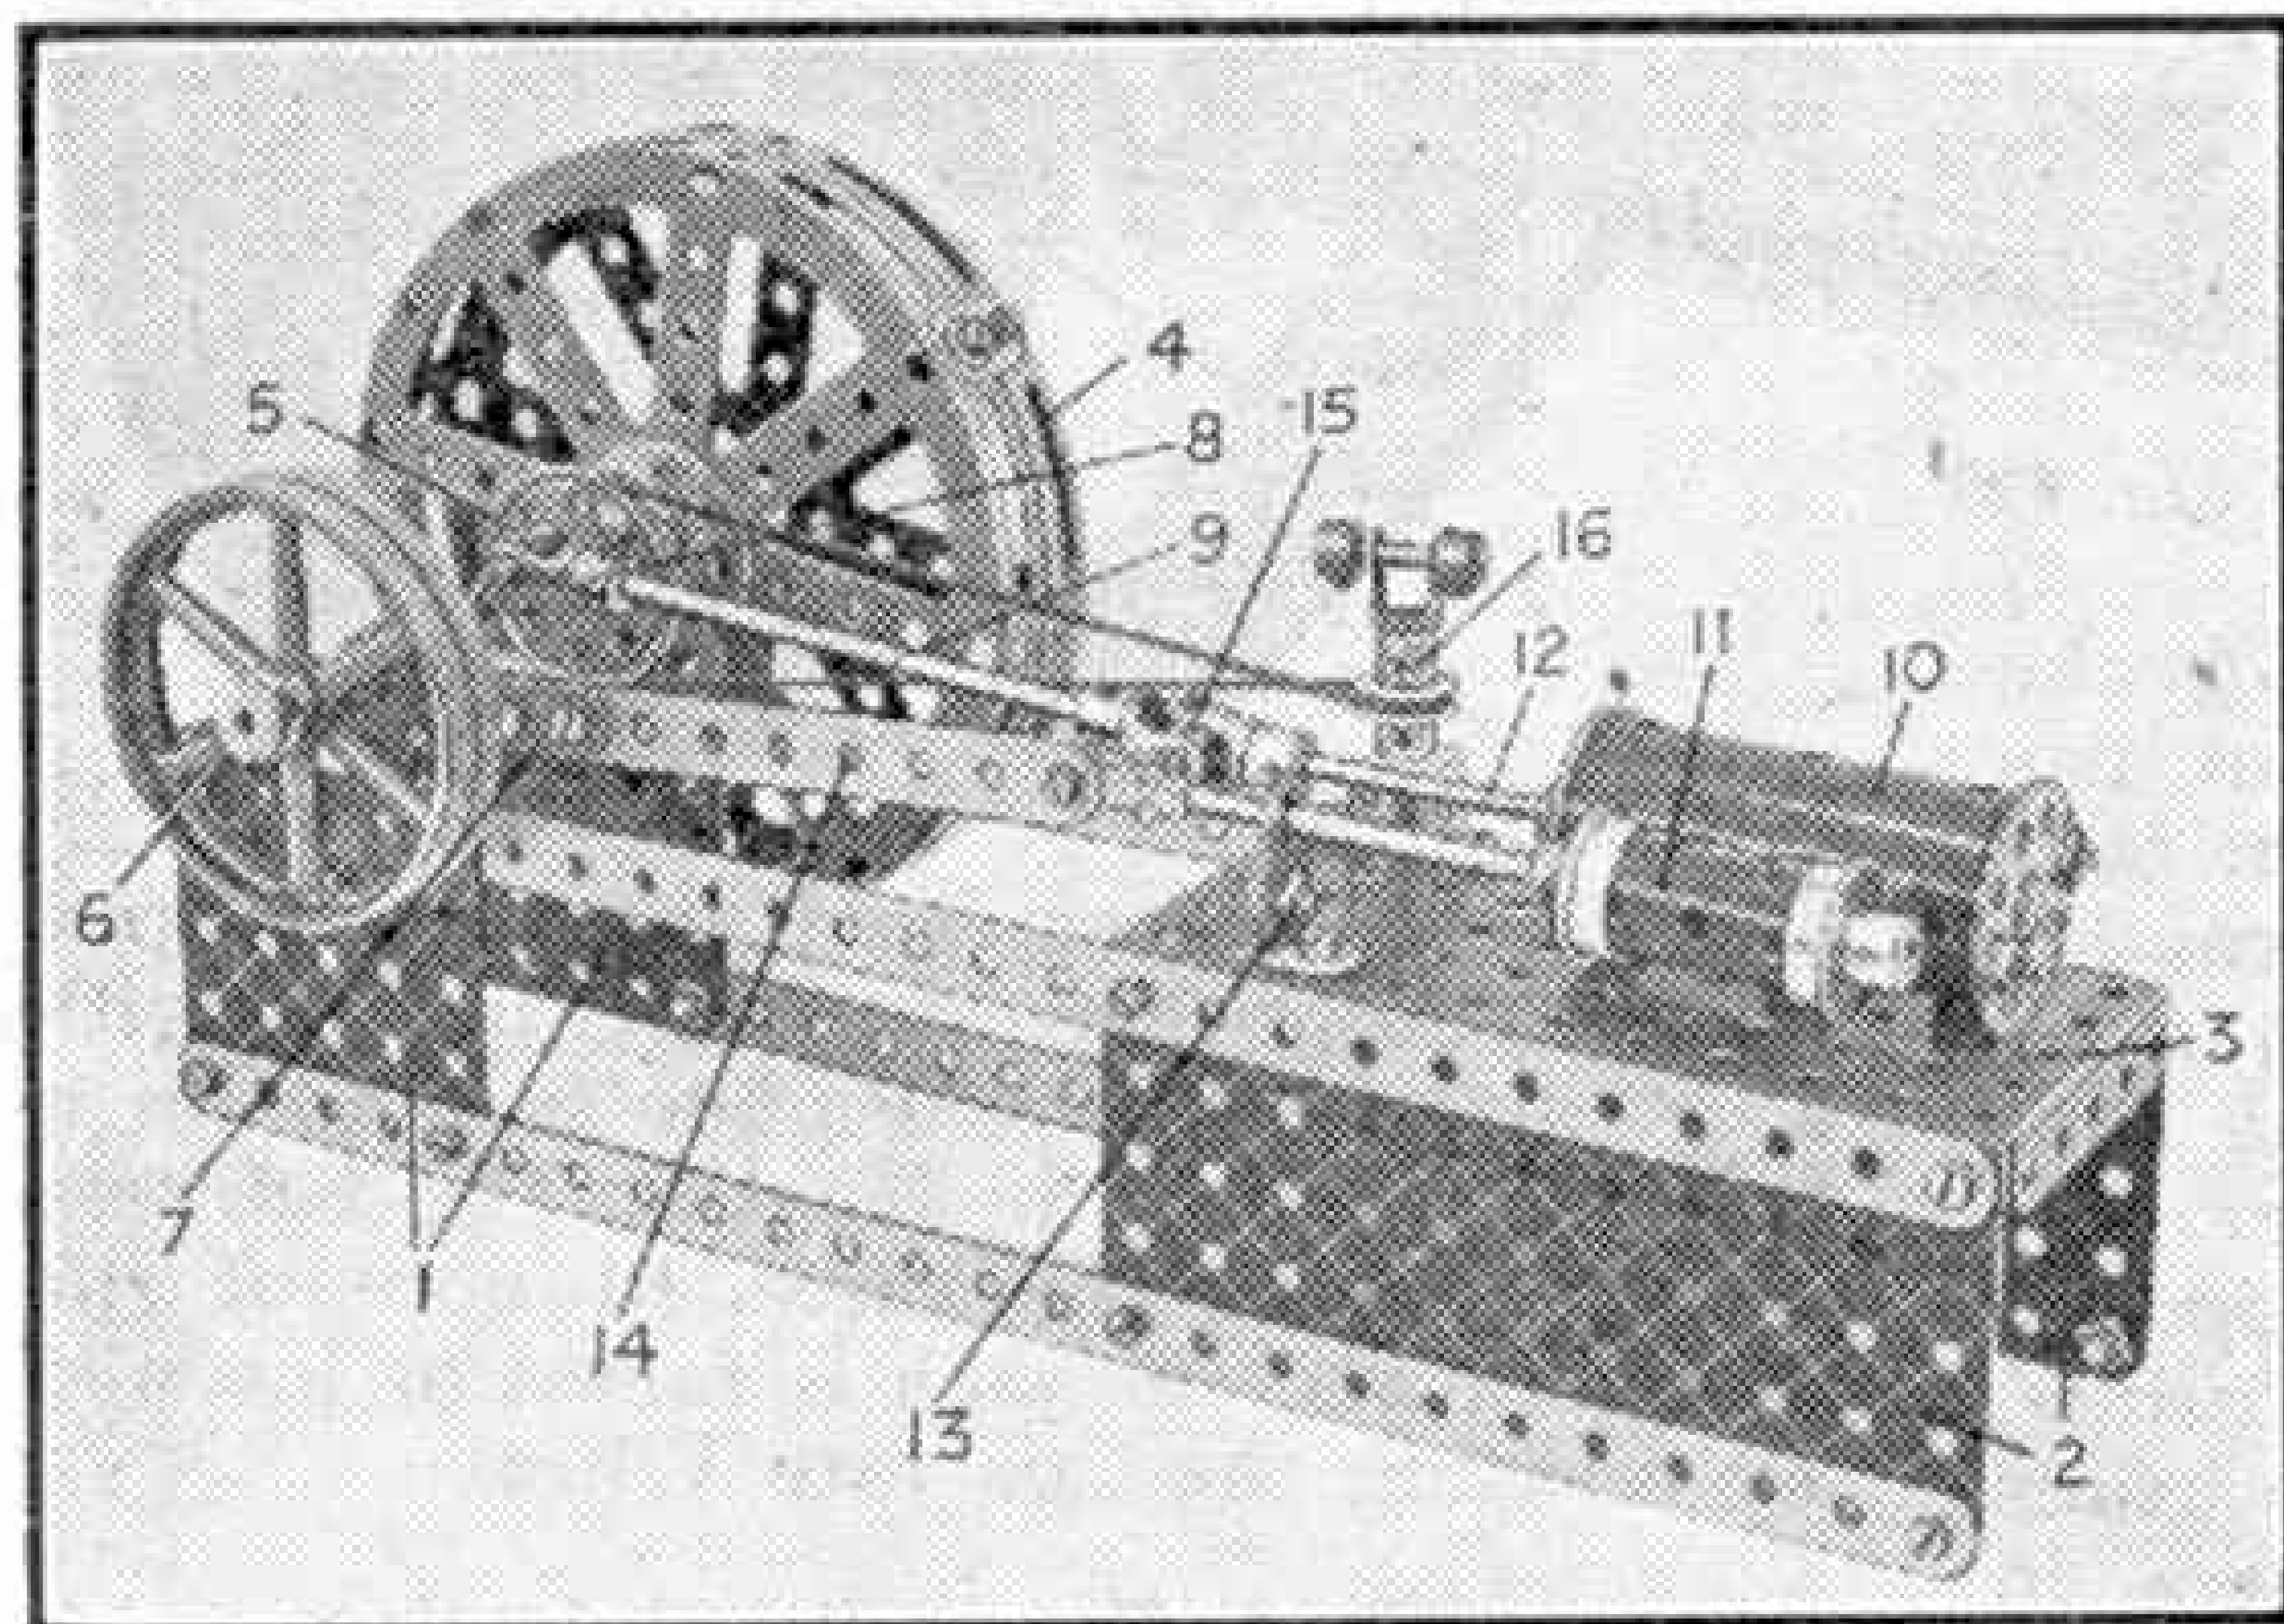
An attractive working model of a horizontal steam engine that is easy to build.
